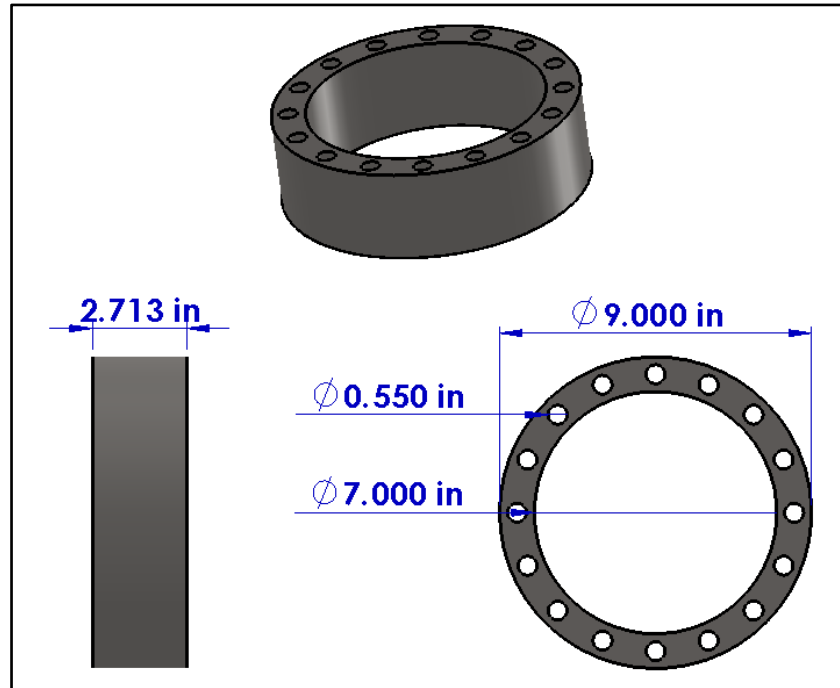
Piezoelectric Shaker Table Collar Component Dimensions
